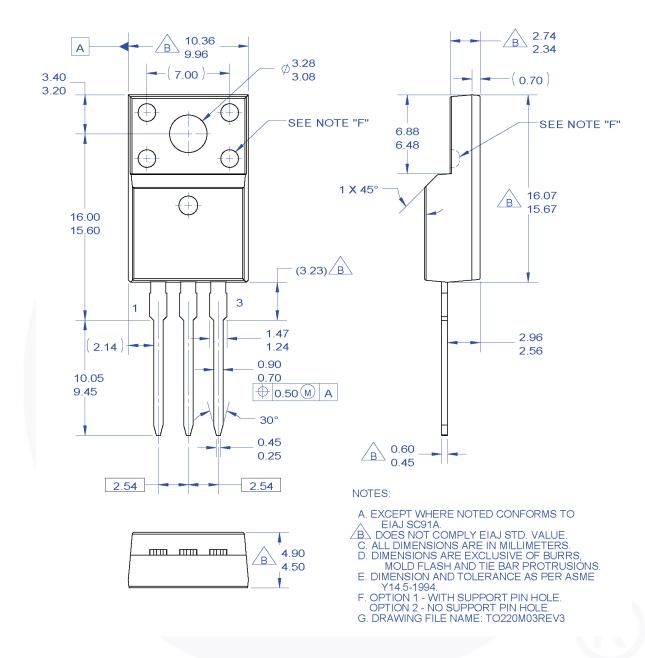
TO220, Molded, 3LD, Full Pack, EIAJ SC91, Straight Lead
